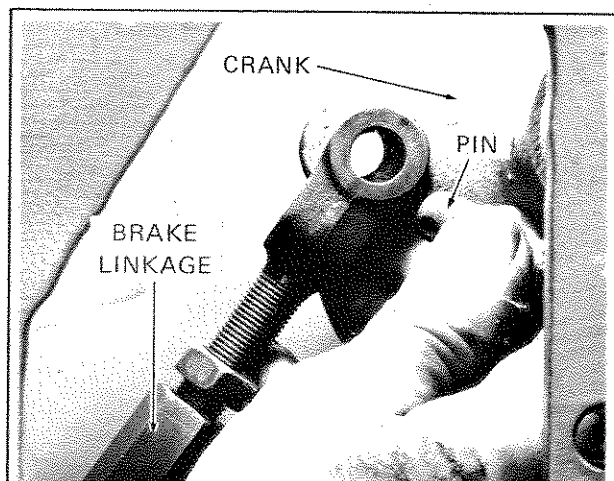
Removal And Disassembly Of PTO Shaft Assembly, Lo-Speed (Sheet 4 of 4)
